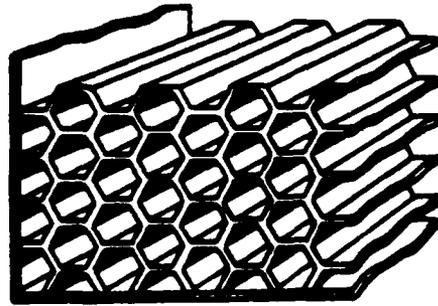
Cell construction. (Source: *USAF Handbook for the Design and Construction of HEMP/TEMPEST Shielded Facilities* [1986].)
